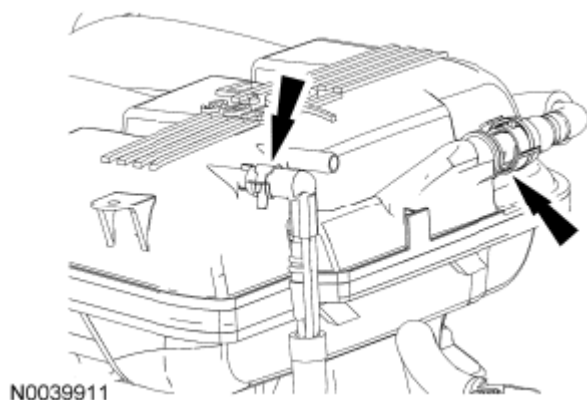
Identifying Vacuum, PCV Hoses And Intake Manifold
